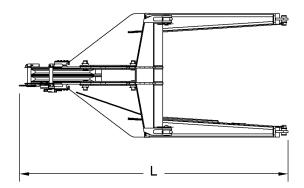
Dimensions of auxiliary jib (79300 lb) for the boom head section
